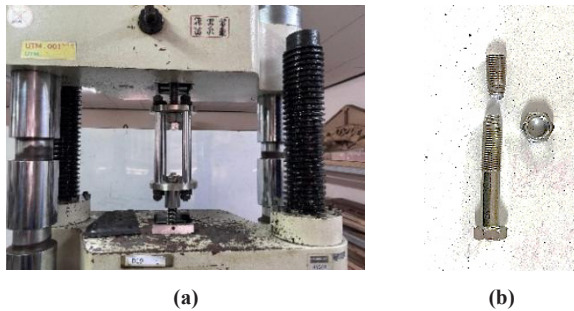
Tensile Tests of 12-mm Diameter Bolts. (a) Tensile Test. (b) Failure of the Specimen.
